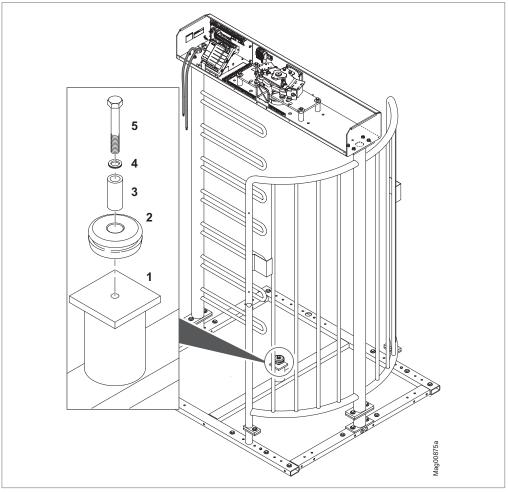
Mounting the floor bearing (plastic bearing, sleeve, washer and hexagon head screw)
